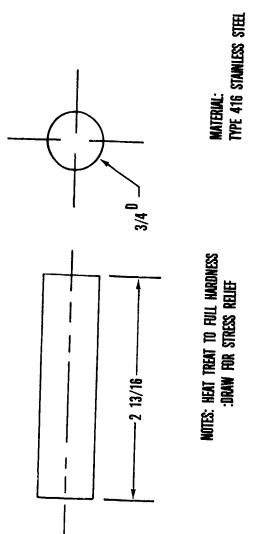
Double Pin Jaw - Attachment Pin (Sheet 4 of 7)
